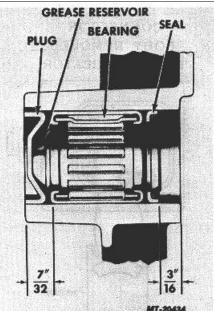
Slip Ring End Bearing and Seal Location MAGNETIZING THE ROTOR
